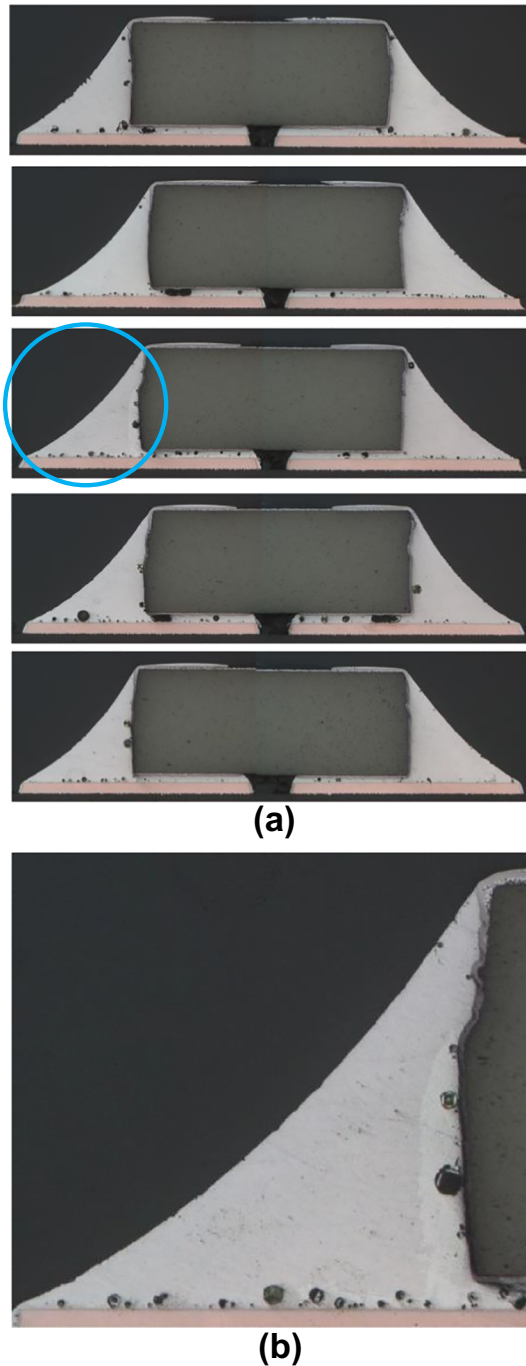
a) Polarized light images of cross-sections of SAC305 solder joints to five CR1206. Out of the ten joints studied, nine were single-grained, and only one had CTG grain structure marked with a blue circle. b) Enlarged view of the solder joint with CTG structure. (For interpretation of the references to colour in this figure legend, the reader is referred to the web version of this article.)
